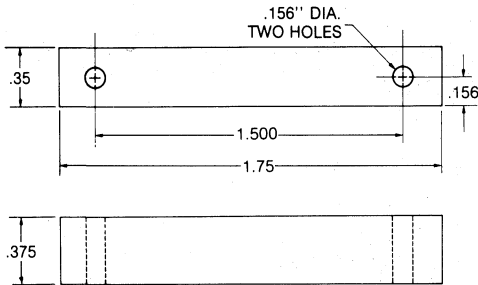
Adapter for Low Profile Package to Standard Hybrid Amplifier Test Fixtures
